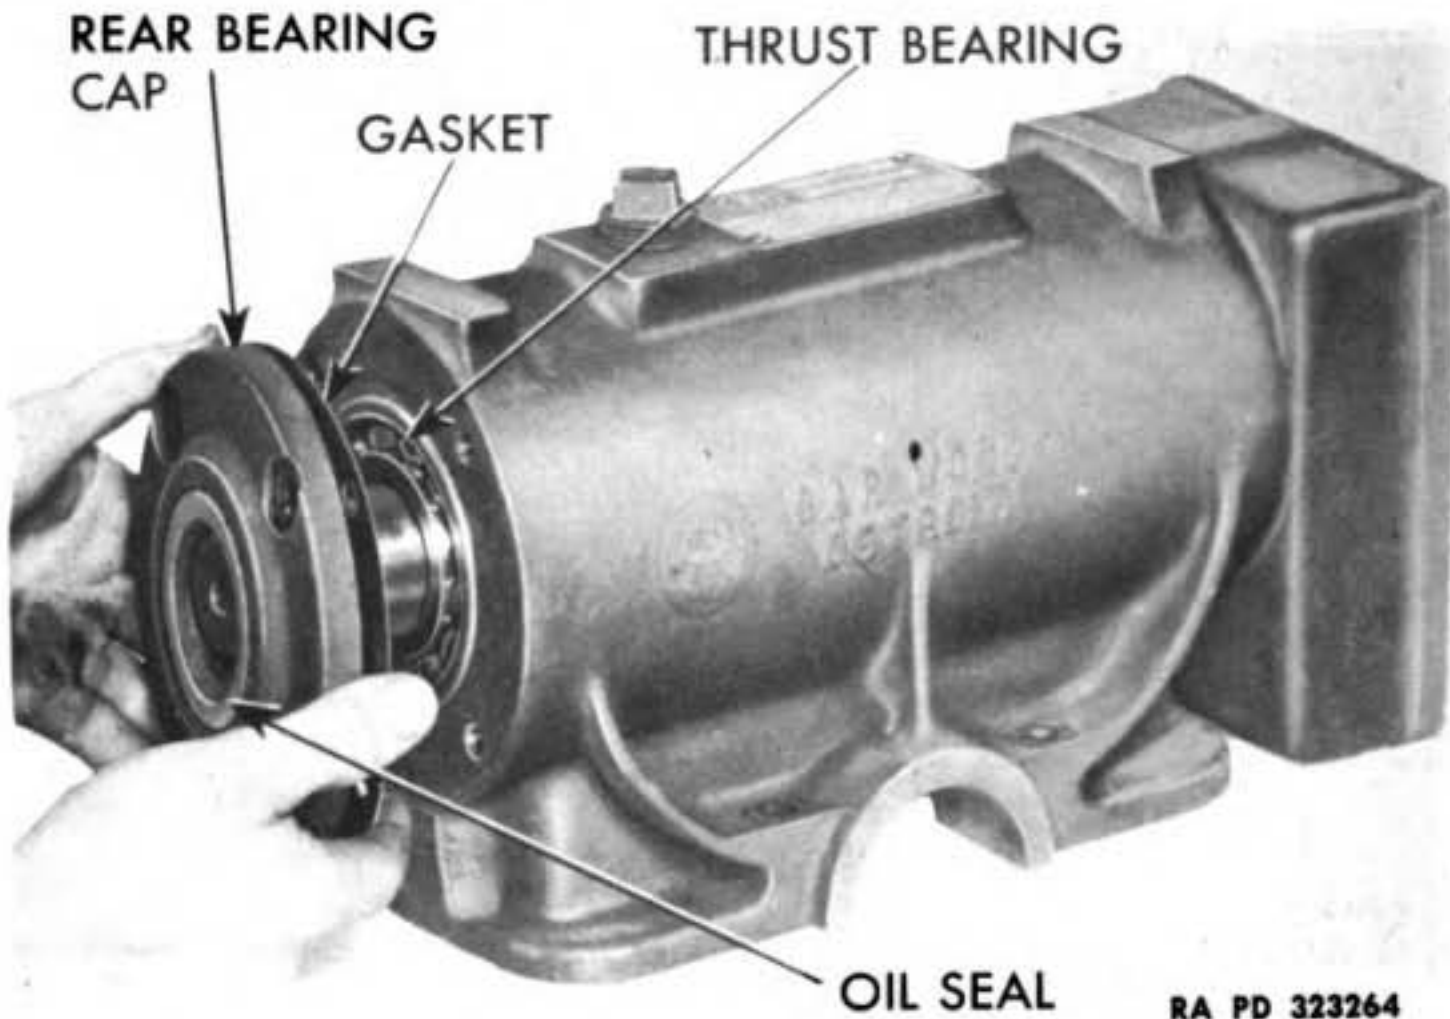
Removing Winch Worm Shaft Gear Bearing Cap
